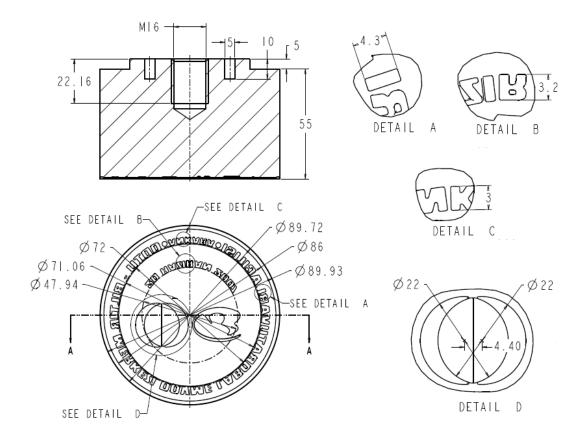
Technical Drawing of the Interchangeable Part of Upper Coining Die
